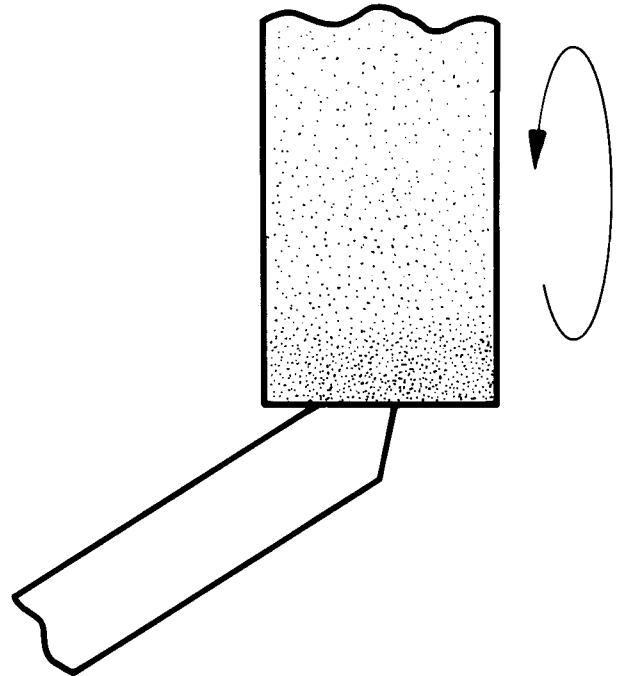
Grinding the side-cutting edge and side relief angles.
